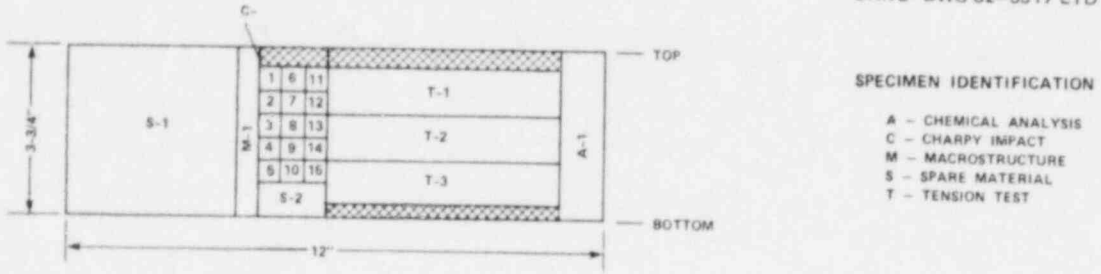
Side-View Cutting Diagram for Welds V811 Through V833
